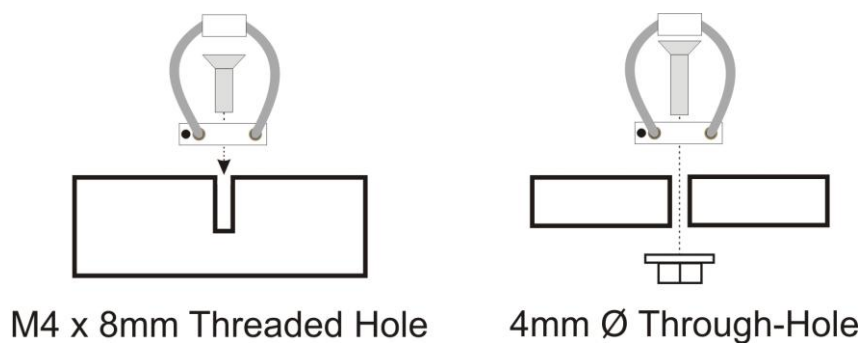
Vehicle Mounting System - Mounting Hole Preparation
